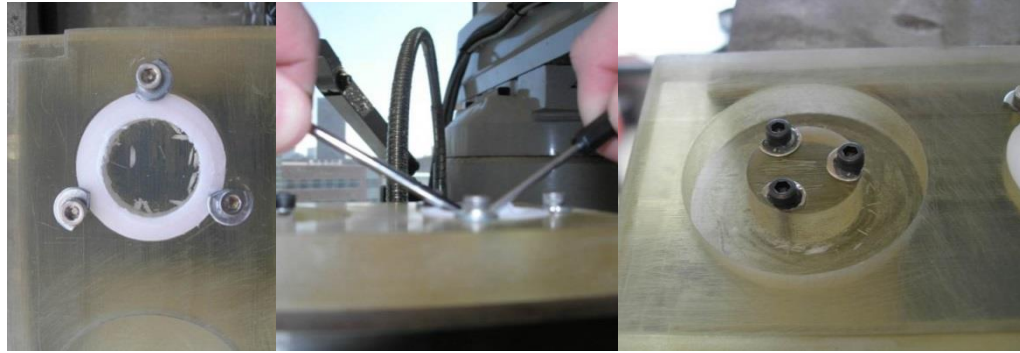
| 3-D printed jig used to hold lids while cutting down to the correct inner and outer diameters.
